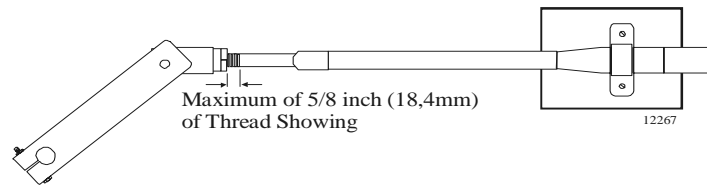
Push-Pull Cable at the Troll Selector Lever
